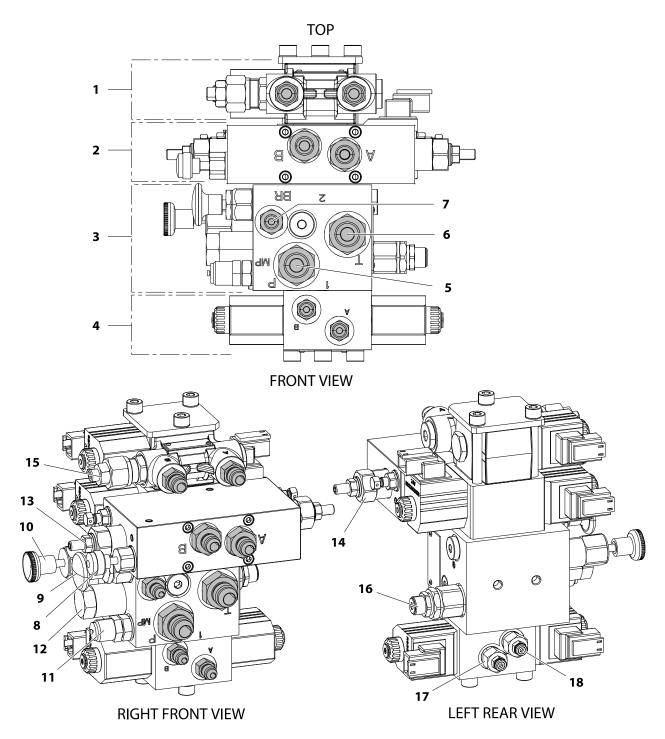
Hydraulic Manifold Assembly - Component Location
